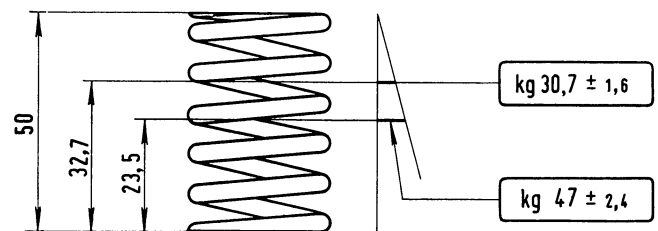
115 C.005 engine outer valve spring testing data.
